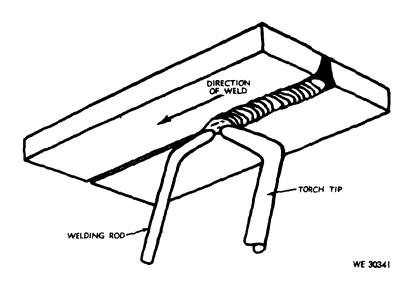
Welding a butt joint in the overhead position.
